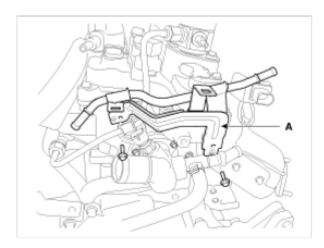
Identifying Vacuum Pipe Assembly Courtesy of HYUNDAI MOTOR AMERICA
